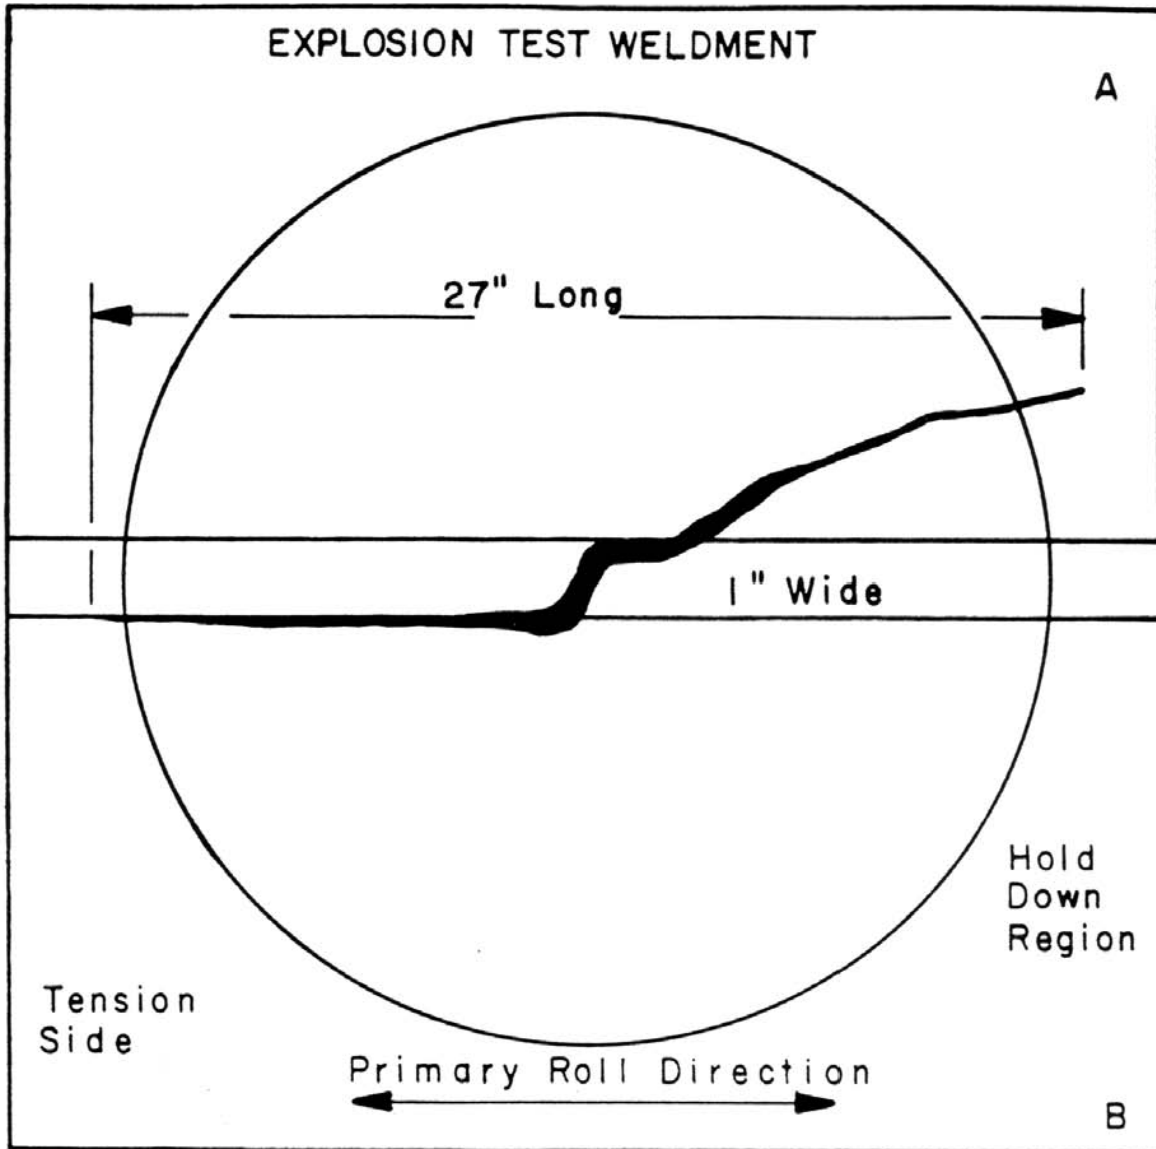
Typical Fracture Sketch of Explosion Test Weldment.
